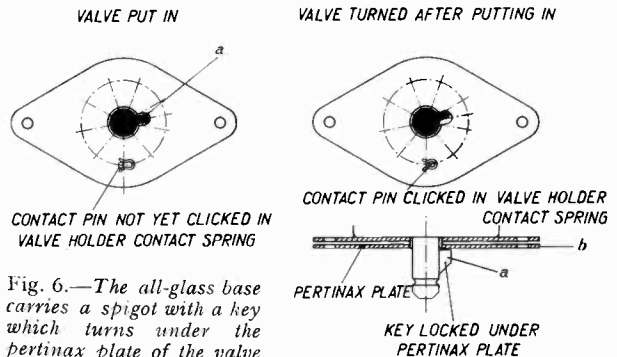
The all-glass base carries a spigot with a key which turns under the pertinax plate of the valve holder. The contact pins are gripped firmly by the contact springs.
